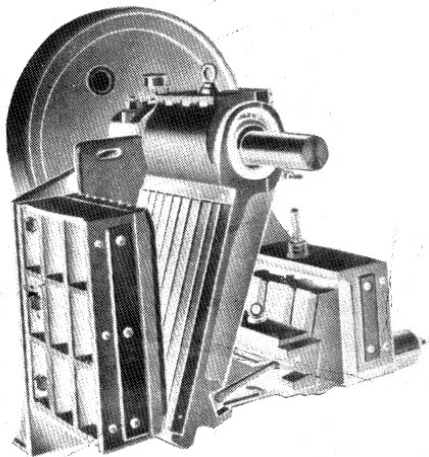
Jaw crushers consisted of many complex shaped elements given by casting
